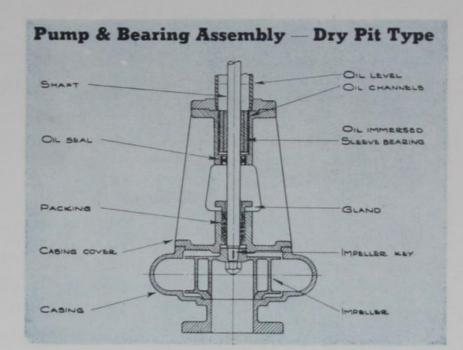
The packing gland is bronze, split type, to protect the lower sleeve bearing from abrasives. The sealing ring is designed for water or grease; because of the balanced impeller design pressure on the packing box is low resulting in reduced wear.
